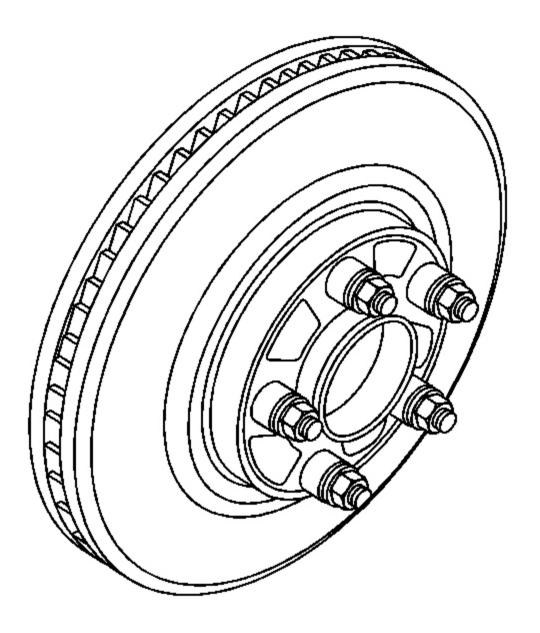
Identifying Brake Rotor Courtesy of GENERAL MOTORS CORP.
